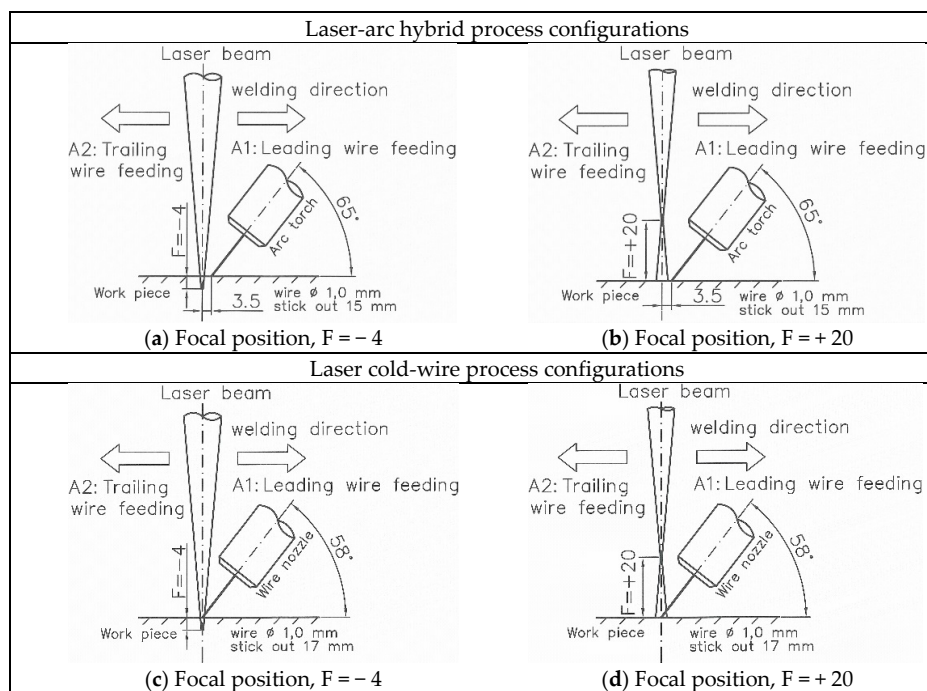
Set-up of laser beam and filler wire feeding arrangements used in laser-arc hybrid welding (upper row; a,b) and laser cold-wire welding (lower row; c,d). A1 = leading wire feeding. A2 = trailing wire feeding.
